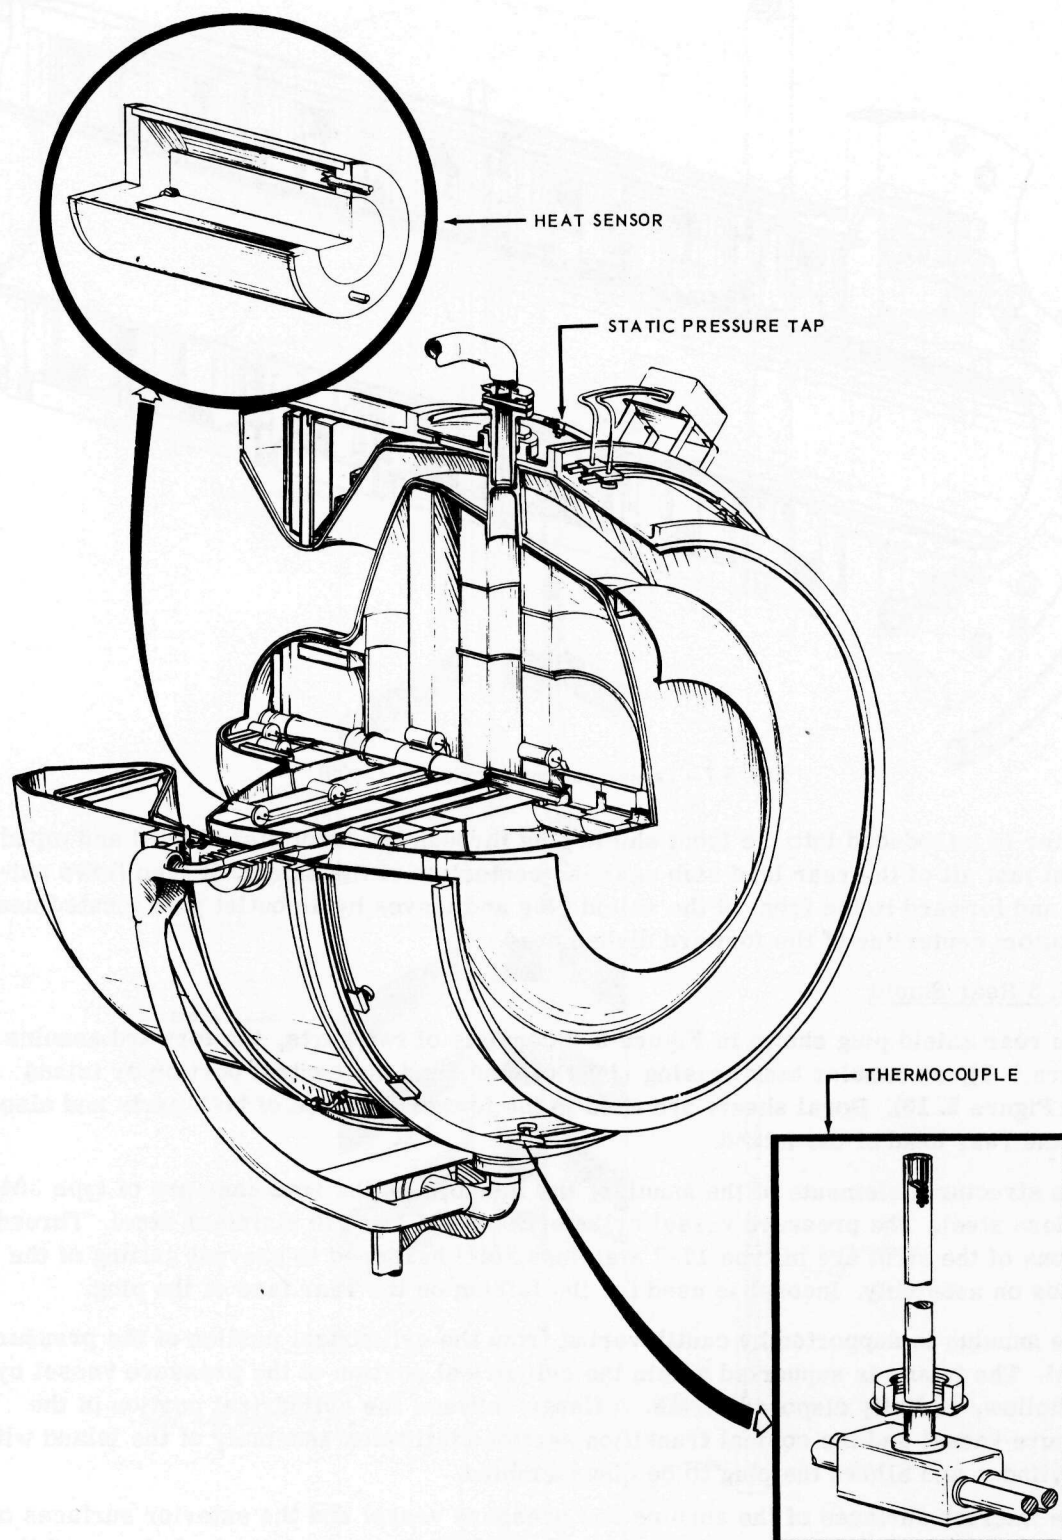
Rear shield plug assembly (Neg. G-963)
